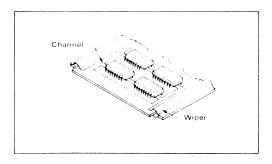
CHANNEL/WIPER HEAT SINKING ON DOUBLE LAYER BOARD
